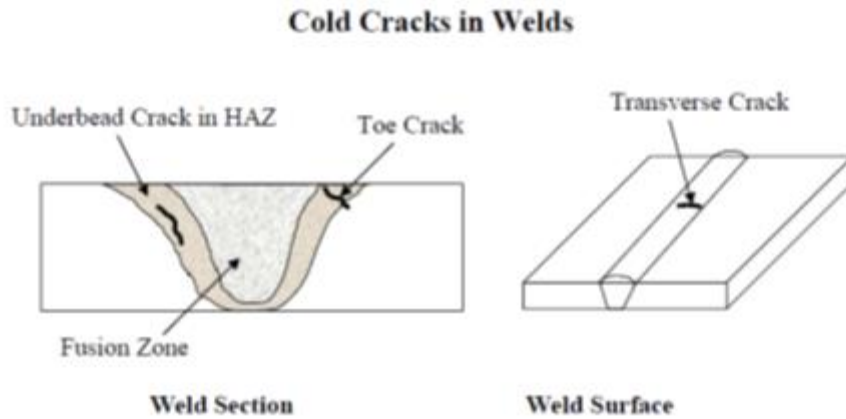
Schematic showing location of typical cold cracks in weld
